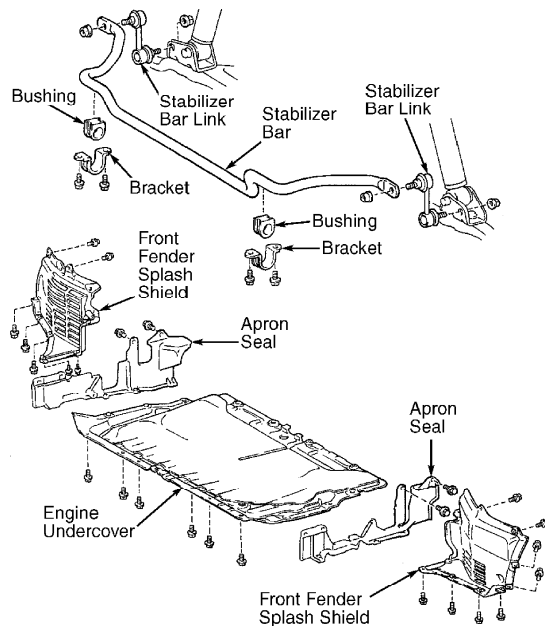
Exploded View Of Stabilizer Bar Assembly
